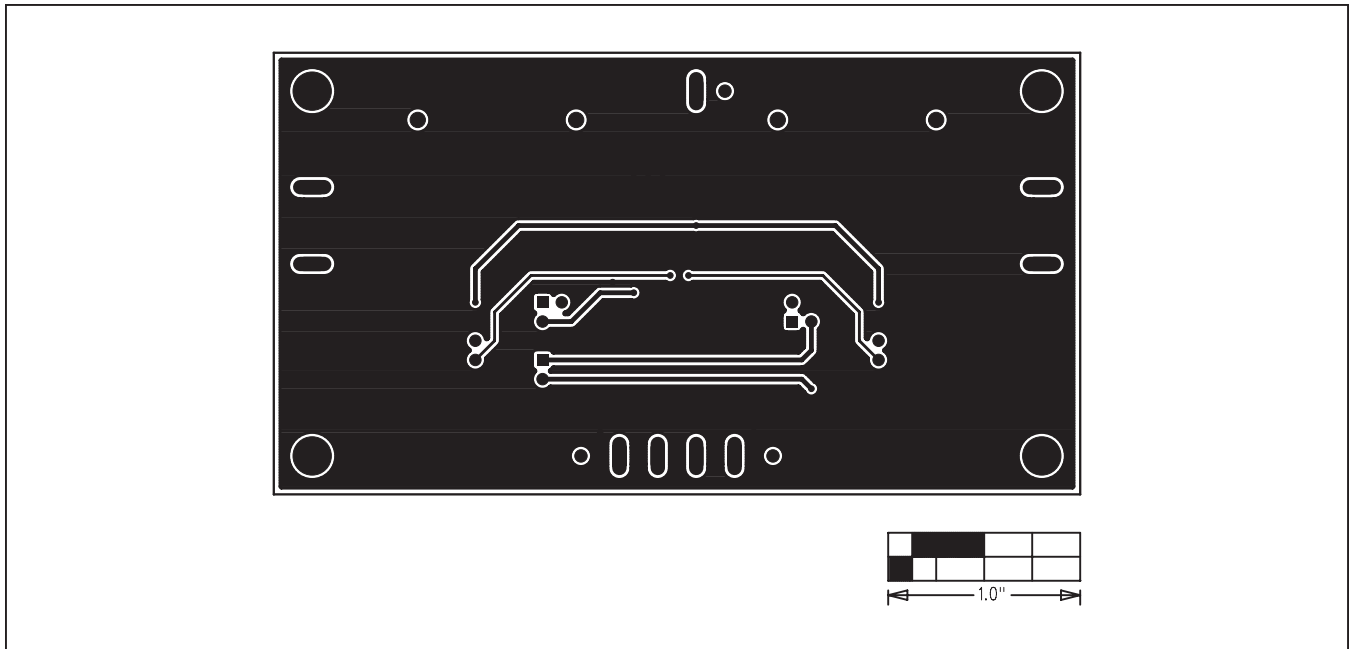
MAX16948 EV Kit PCB Layout—Solder Side
